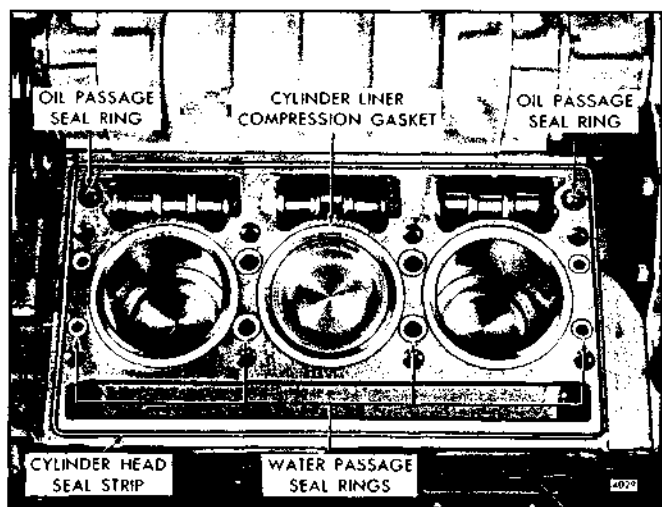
Cylinder Head Gaskets and Seals in Place on Cylinder Block
